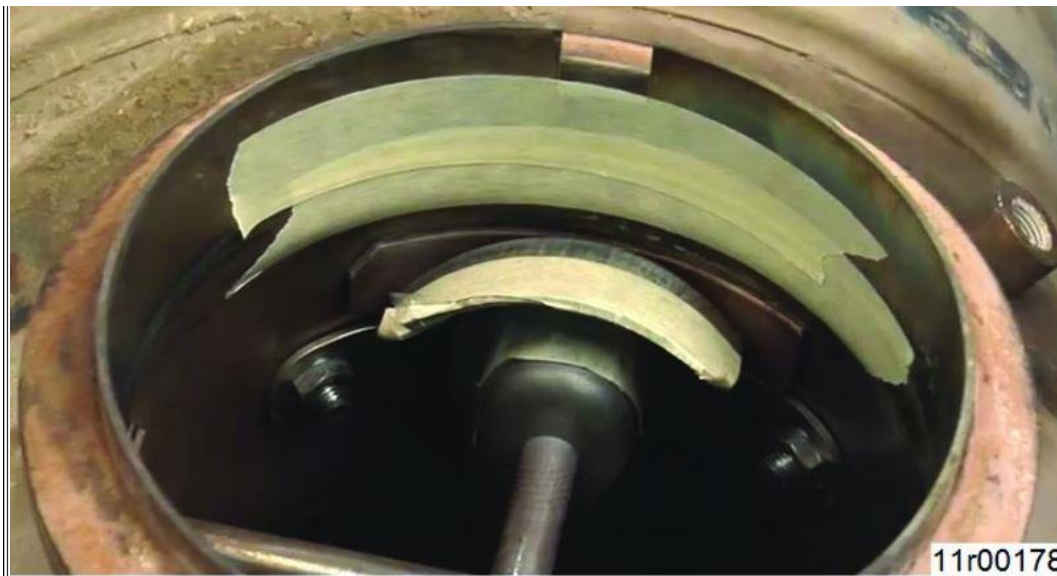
Masking Tape on SCR Catalyst Outlet Pipe
